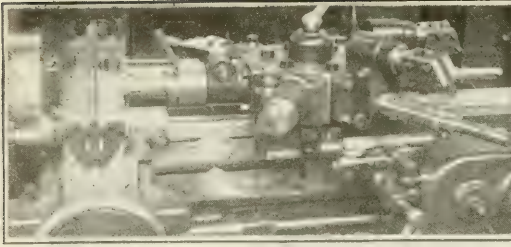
SET UP FOR MACHINING GUN—METAL DISTRIBUTOR BUSH.
